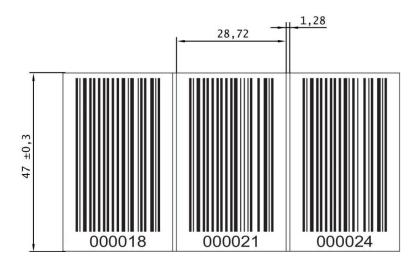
Dimension drawing barcode tape BCB G30 with 30 mm grid (all dimensions in mm)
